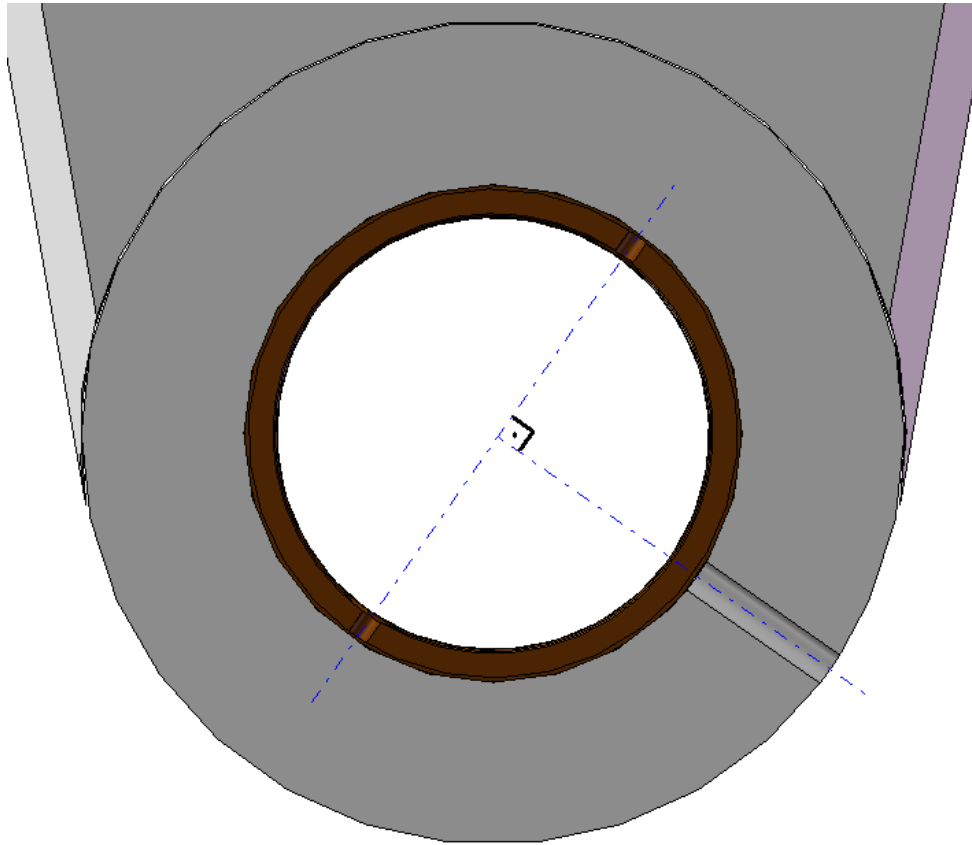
Angular positions of the oil holes in the test bearing and in the housing
